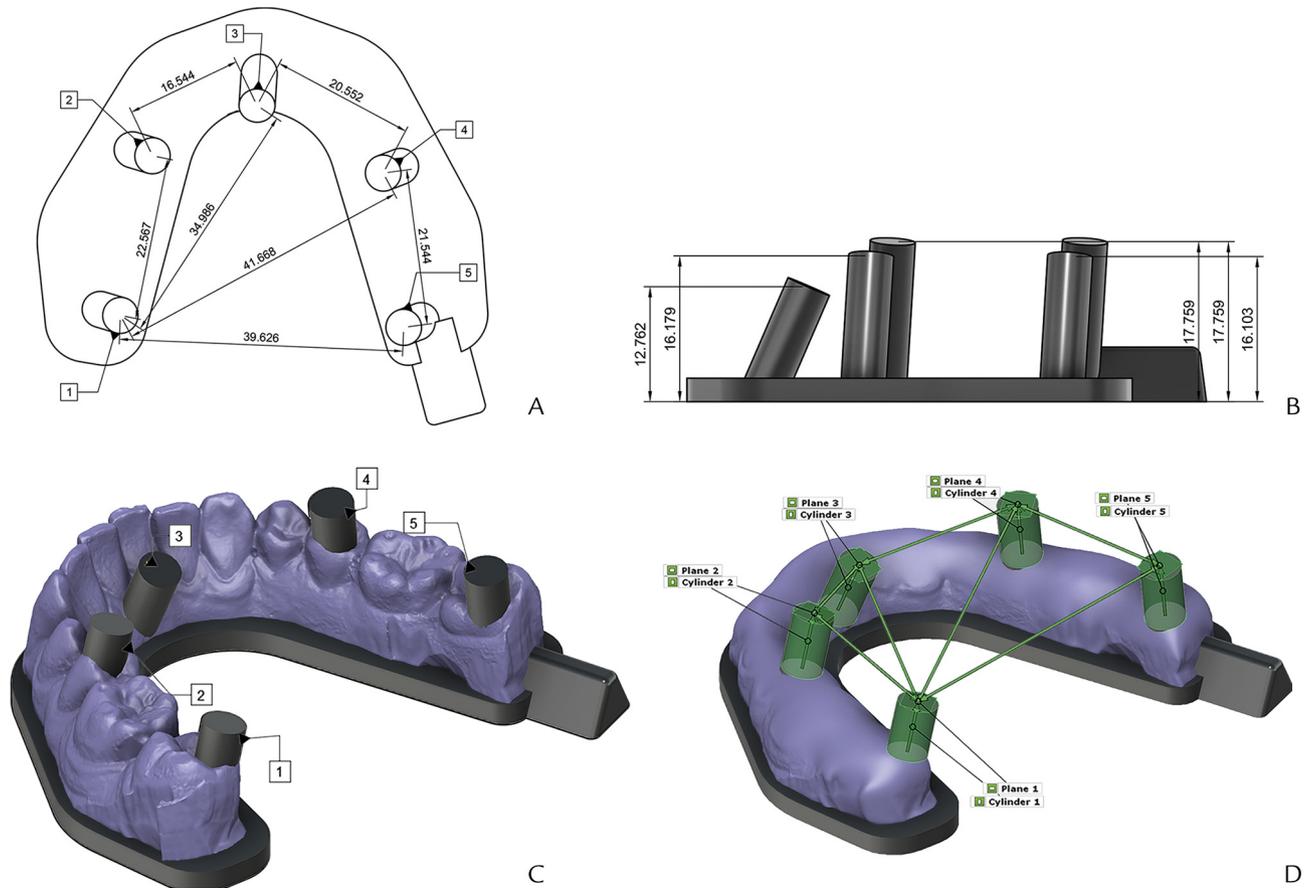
A, Occlusal view of CAD illustrating cylinder orientation. Dimensions from CMM measurements. B, Lateral view of CAD sketch illustrating cylinder design without cast. C, Profile view of assembled dentate CAD cast with cylinder abbreviations. D, Profile view of assembled edentulous CAD cast. Illustration of intersections between cylinders, planes, and intersecting points. CAD, computer-aided design; CMM, coordinate measuring machine.
